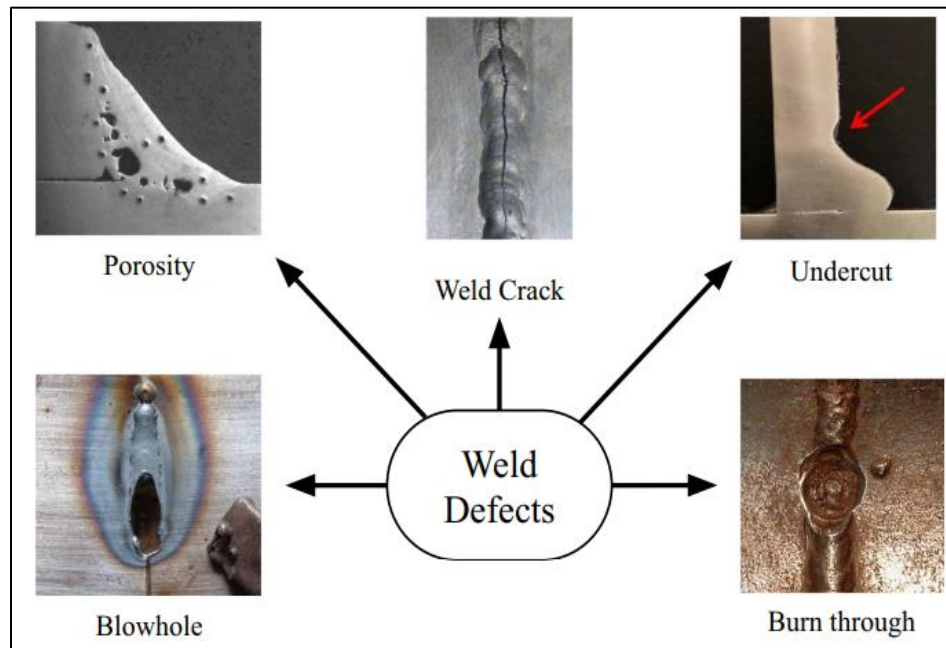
1 The commonly observed defects in real-time welding (Madhvacharyula et al., 2022)
